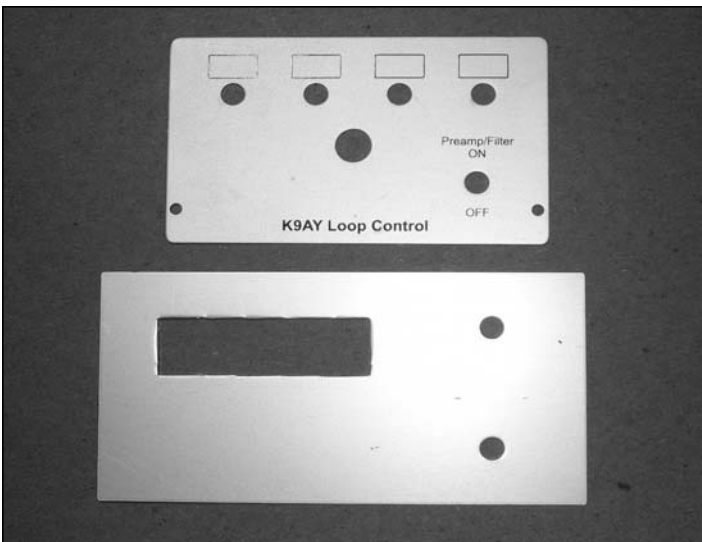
Examples of punched metal pieces: a panel with just round holes, and another panel with a large rectangular hole that was “nibbled” with a square die.
